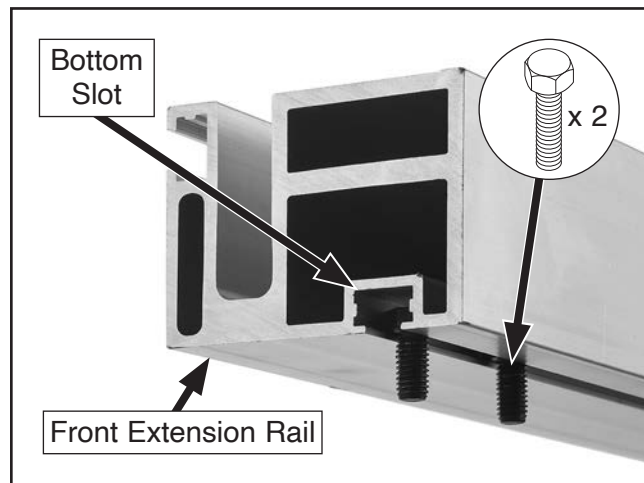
Hex bolts installed in front extension rail for mounting ON/OFF switch.
